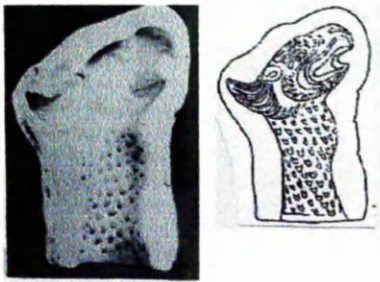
Half of a two-piece mould for spouts in the shape of a phoenix-head
